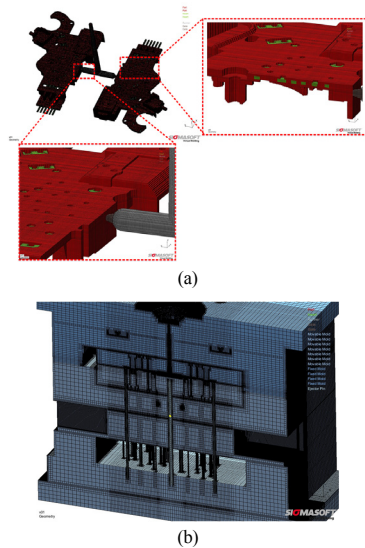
The FVM to divide the contour element mould (a) products and runner mesh shape (b) mould mesh shape
